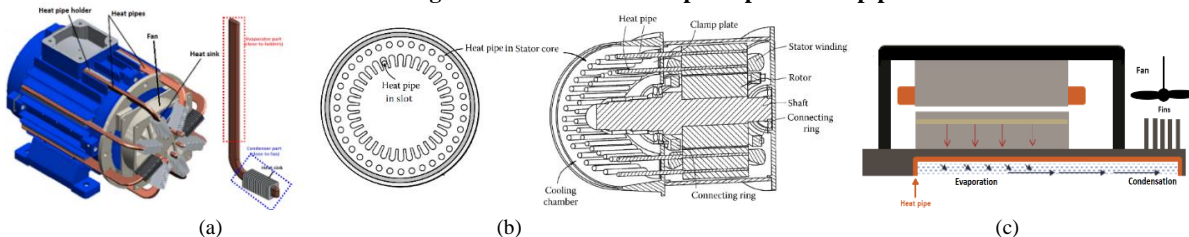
Heat pipe cooling methods proposed in electric machines: (a) housing [Put_17], (b) slots and stator core [Has_12], (c) shaft [Tes_13]
